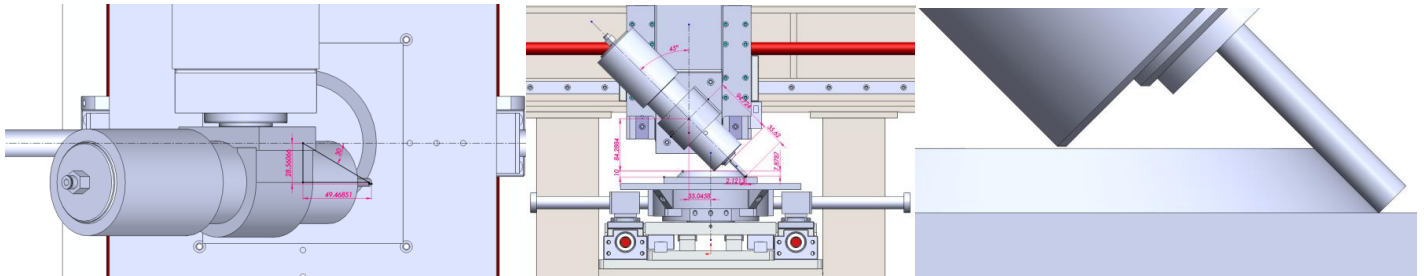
Hybrid parallel-serial five-axis machine tool.
